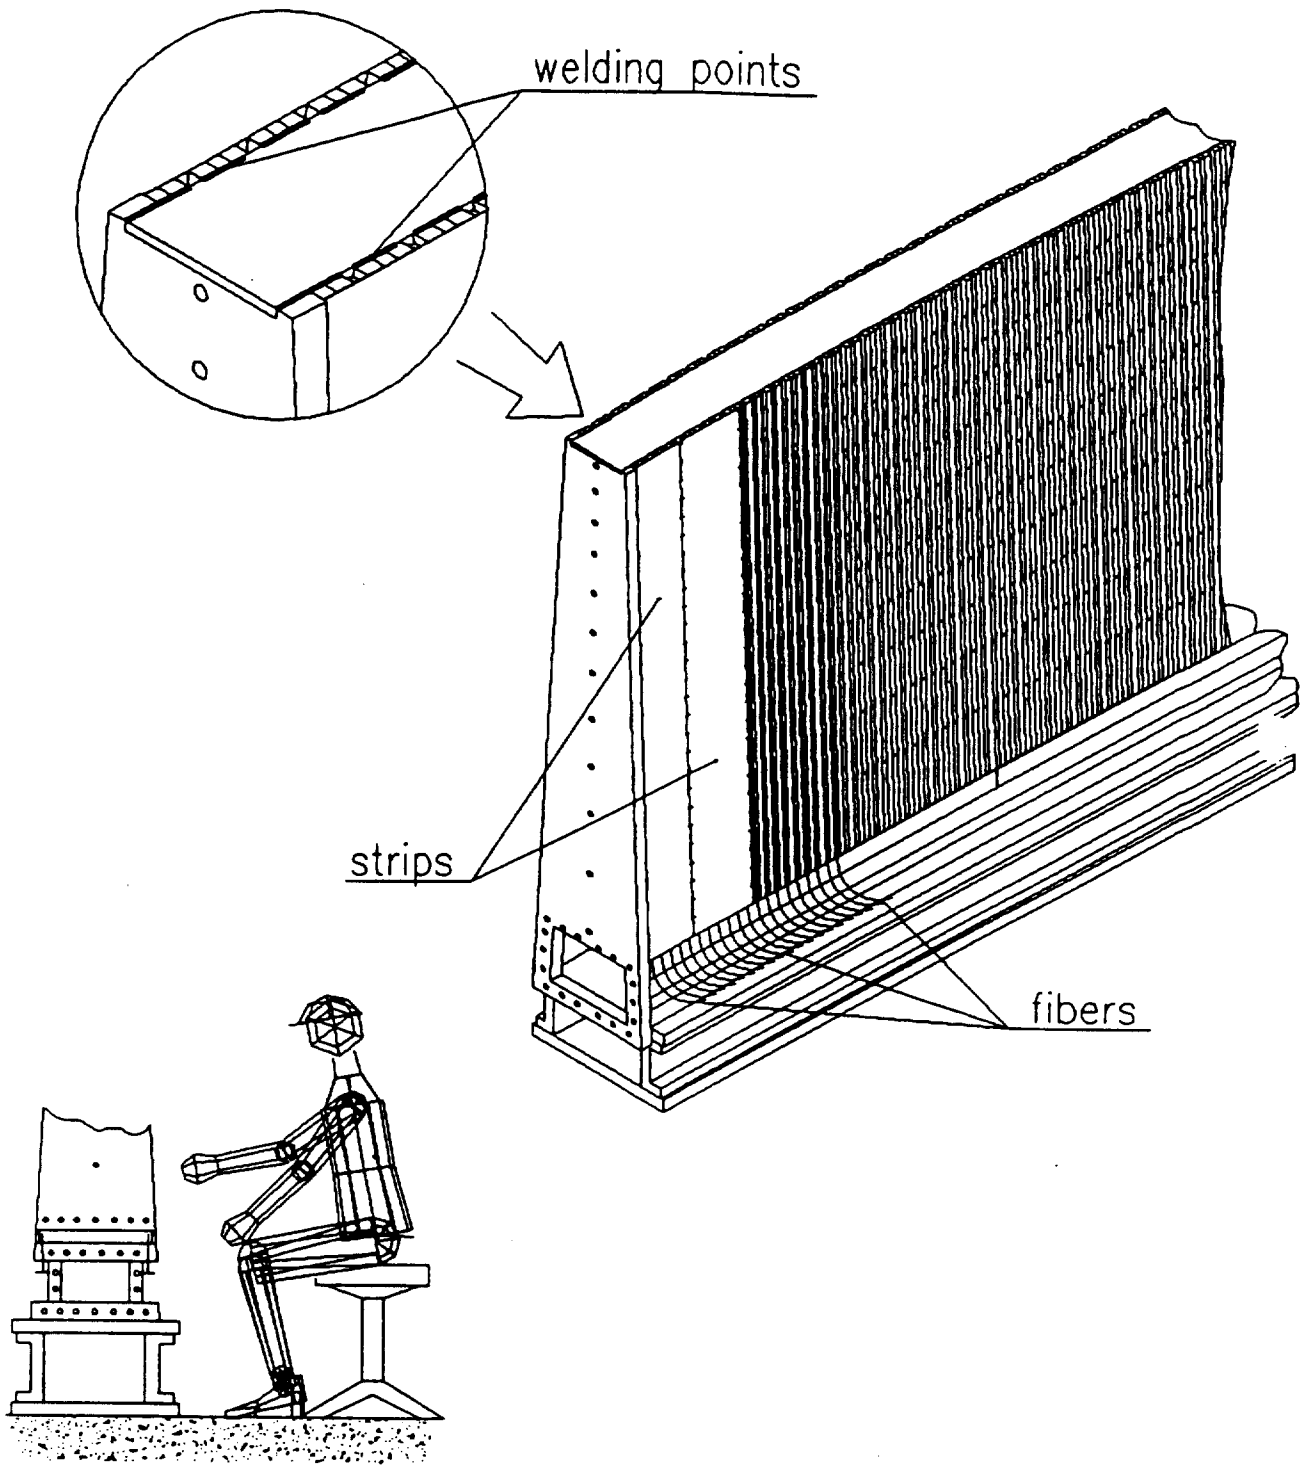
Welding of strip, tightening of bolts which fasten modules to girder, final of supermodule sides, assembly of lower tiles, stud and tube. Mounting of fibers and aluminium reflectors, spot-welding of 0.1mm thickness steel strip, bundle fibers.
